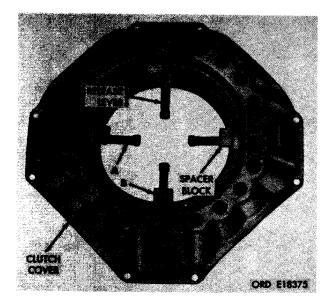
REMOVING OR INSTALLING SPACER BLOCKS BETWEEN RELEASE LEVERS AND CLUTCH COVER. <u>Note.</u> The four spacer blocks were installed before the clutch cover was removed from the engine (fig. 274). The spacer blocks prevent clutch cover distortion as the cover retaining screws are removed.
